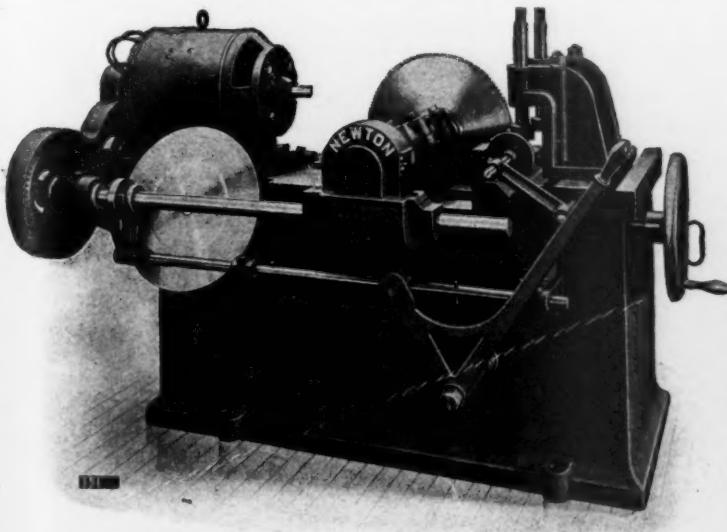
DIRECT GEARED MOTOR DRIVE UPON A COLD-SAW CUTTING-OFF MACHINE.—NEWTON MACHINE TOOL COMPANY.
